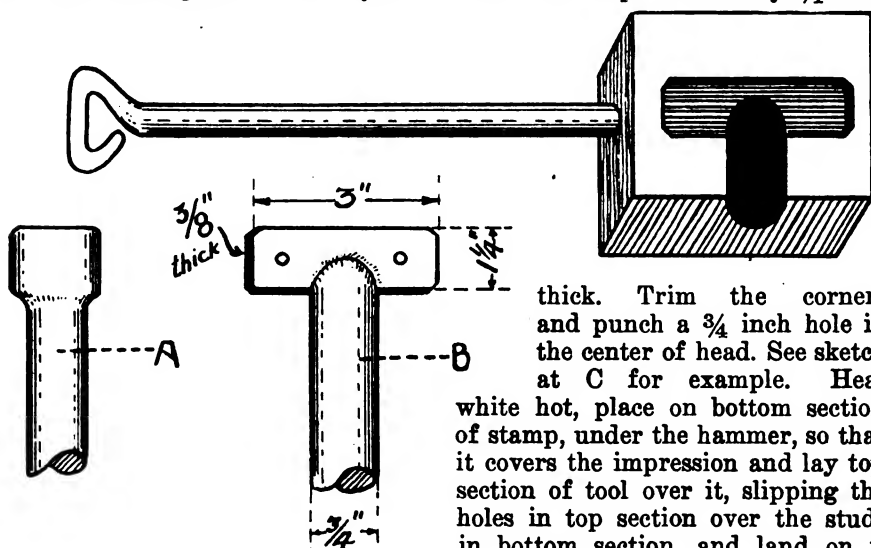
STAMP FOR MAKING BRACKET ENDS
